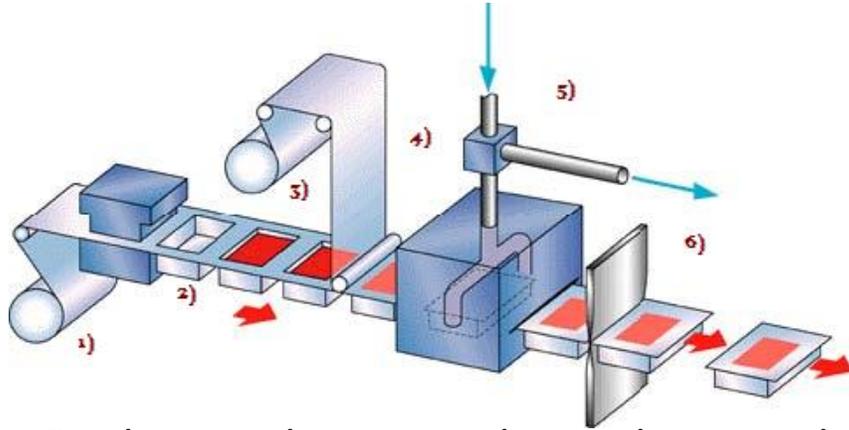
(A2.5 Course outline 2) Blueprint of the thermoforming machine with compensated vacuum, fed by two film coils. A thermoformable inner film (1) is formed in a die (2). The food product is placed in this tray and covered by a superior film (3). A vacuum (5) is created in the tray and thanks to it comes the gas mixture (even before the upper film is closed by hot welding).
